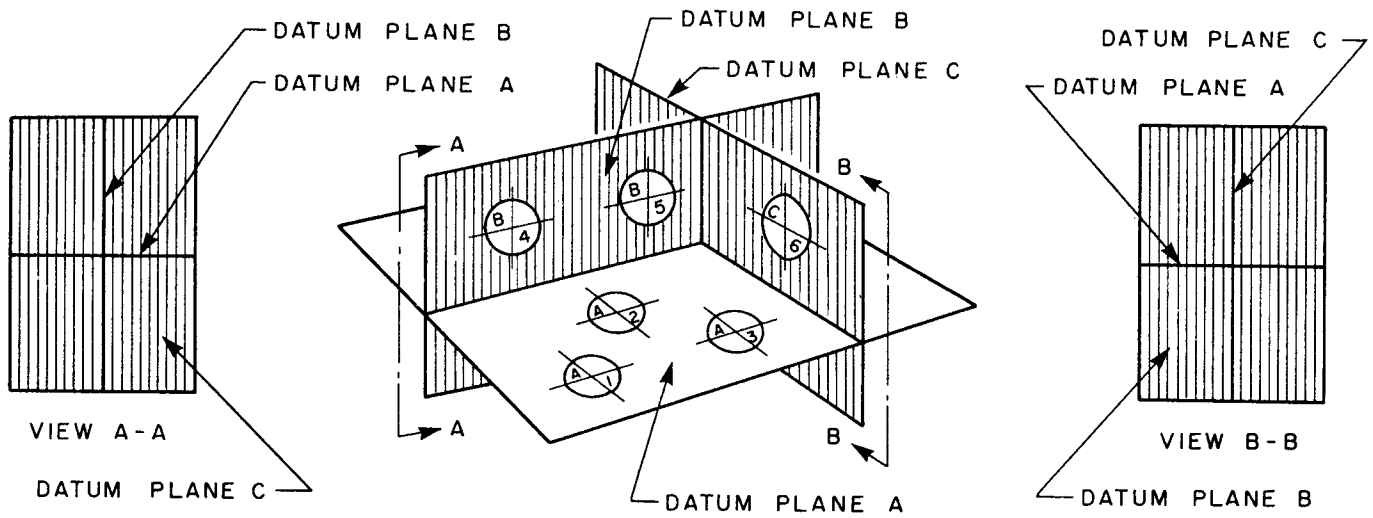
Schematic illustration of perpendicular relations among the three datum planes (1).
